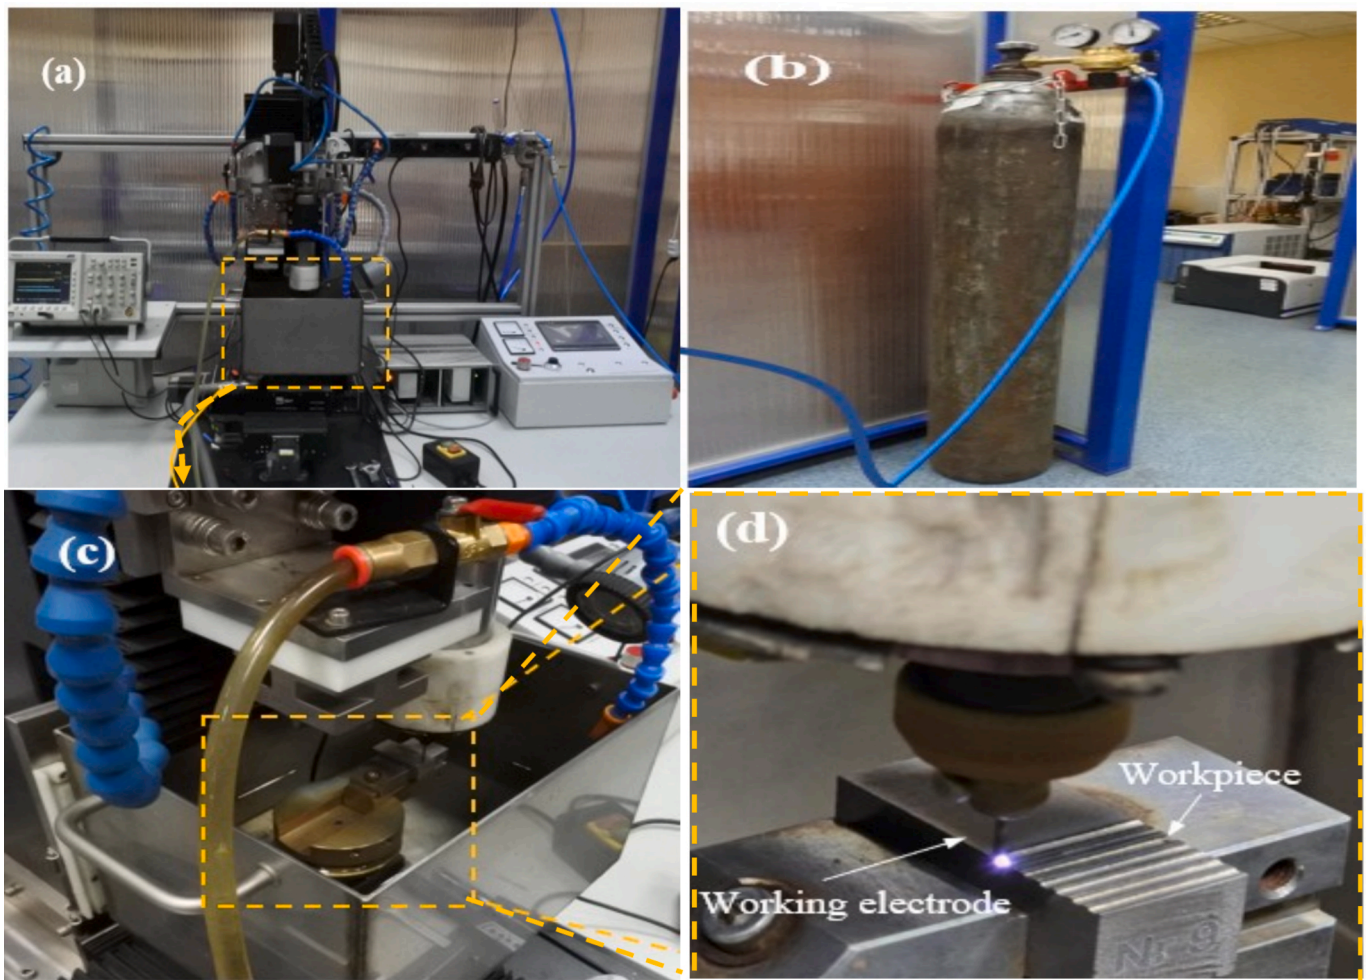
Experimental test stand (a) main EDM machine modified for dry EDM (b) gas supplier and piping to the machine (c) dry EDM process (d) formation of spark in dry EDM in milling kinematics which machine grooves on the cubic workpiece.
